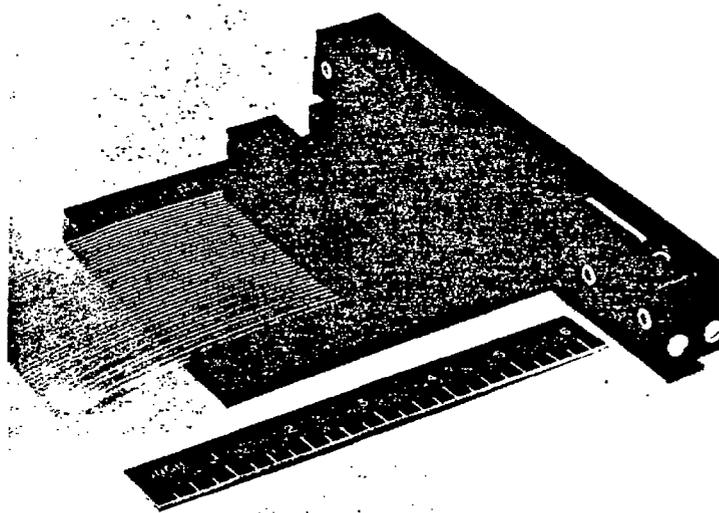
NASA/MSFC plane stripper (Drawing No. 2235).
